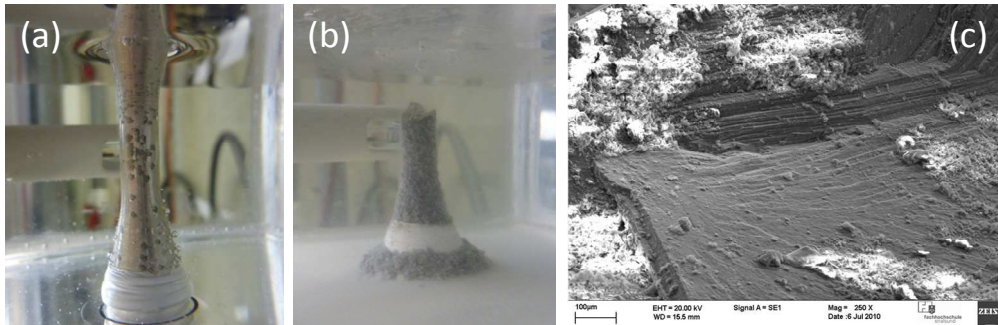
(a) Development of pitting corrosion, (b) fractured sample with corrosion product and (c) fractured surface of the Mg10Gd1Nd (area close to the tip initiation)
